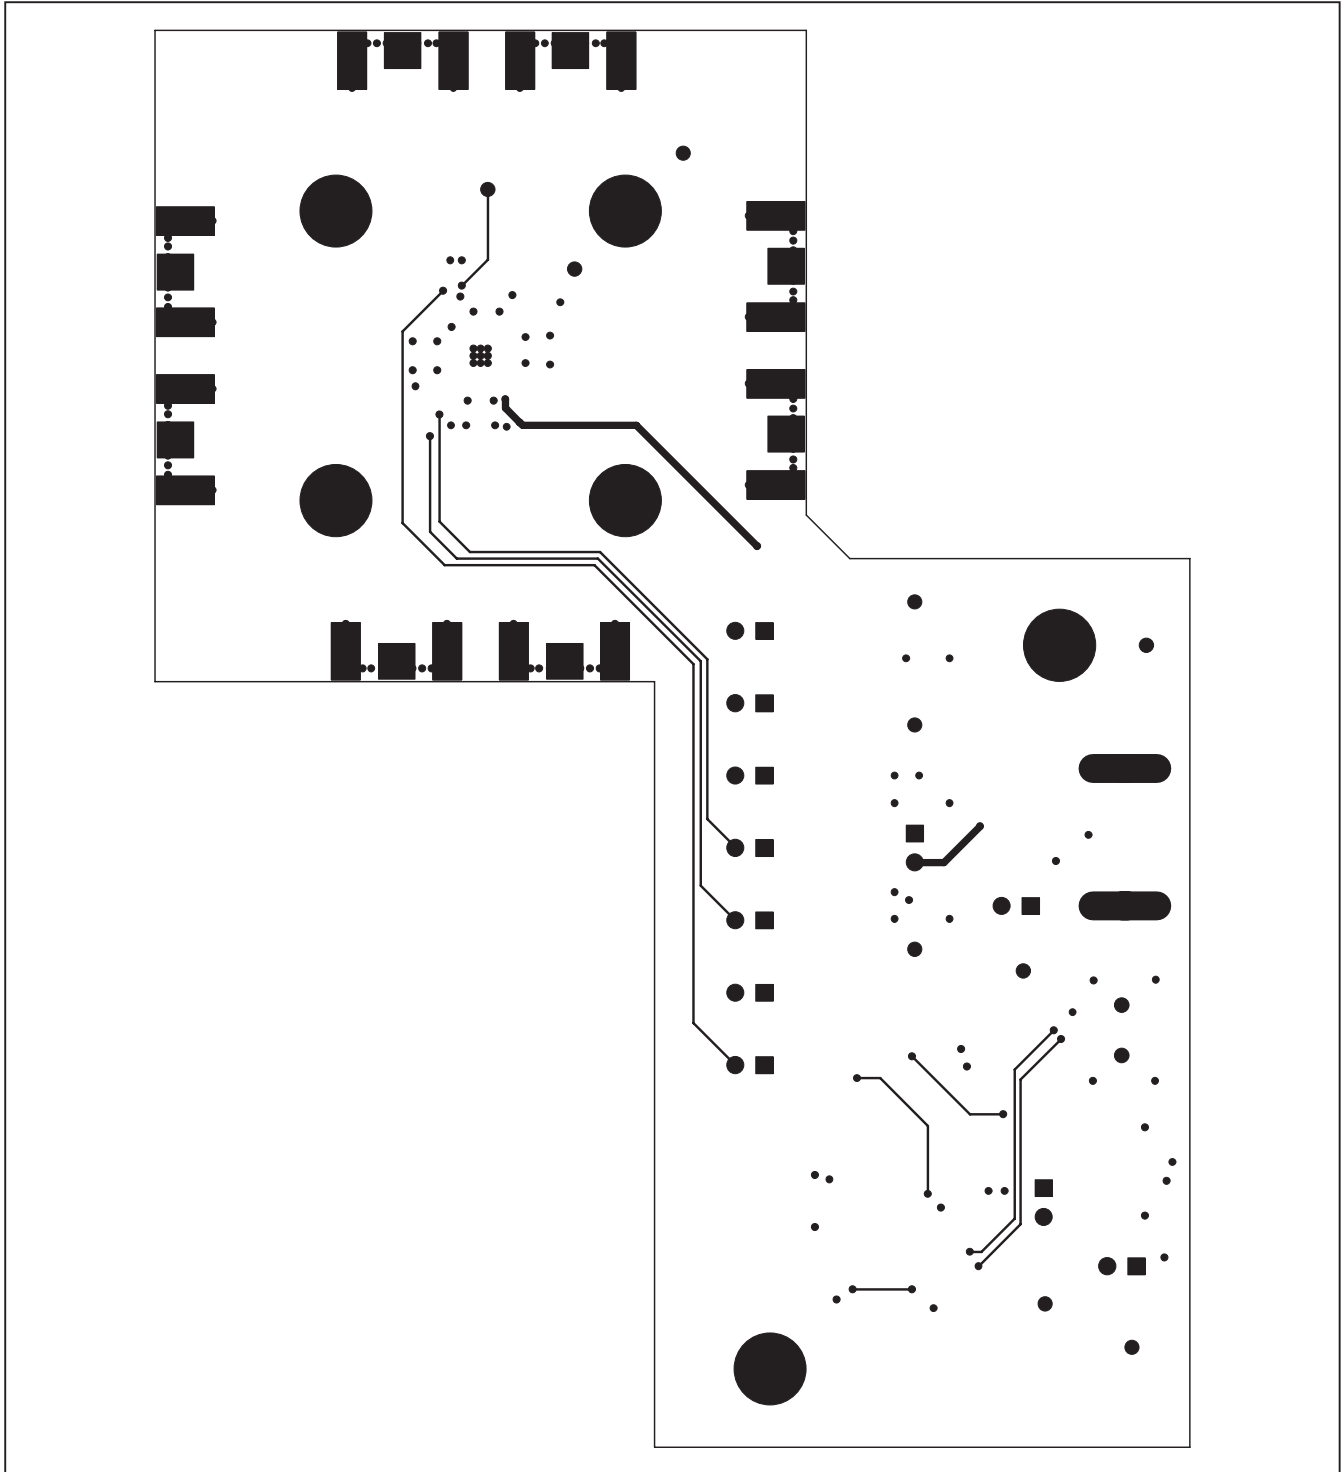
MAX3799 EV Kit PCB Layout—Solder Side
